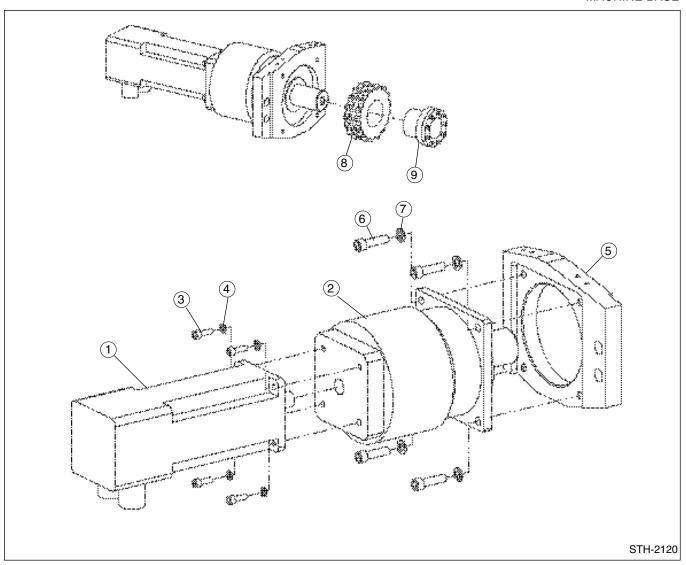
FIGURE C - SERVO MOTOR & REDUCER ASSEMBLY
